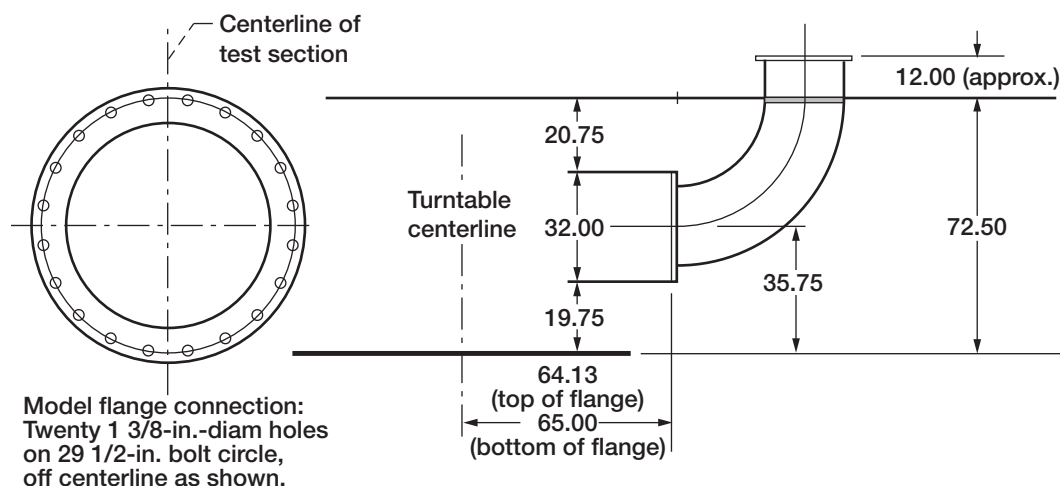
IRT test section showing location of 24-in. standard steel flange and elbow for connecting inlet models to exhaust system. All dimensions are in inches.
